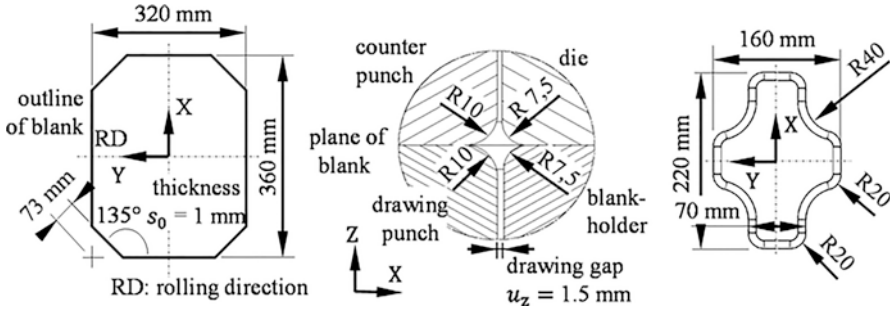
Geometry of blank (left), tool radii (middle) and drawing punch (right)
